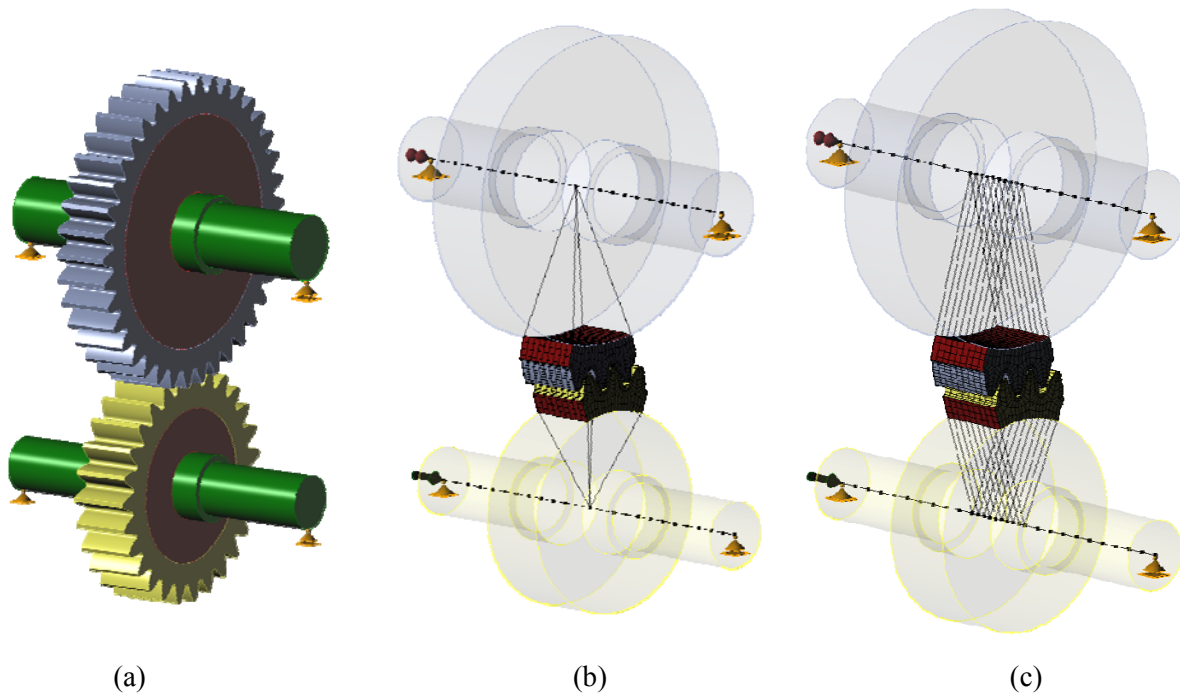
(a) Geometric model of a spur gear drive with supporting shafts; (b) finite element model of gears and shafts, and (c) finite element model of gears and shafts with consideration of torsional deformation.
